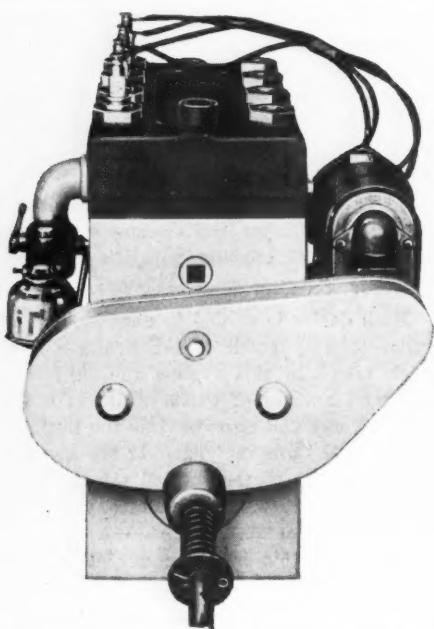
Front view of the Able motor, which uses pressed-steel in many of its parts
